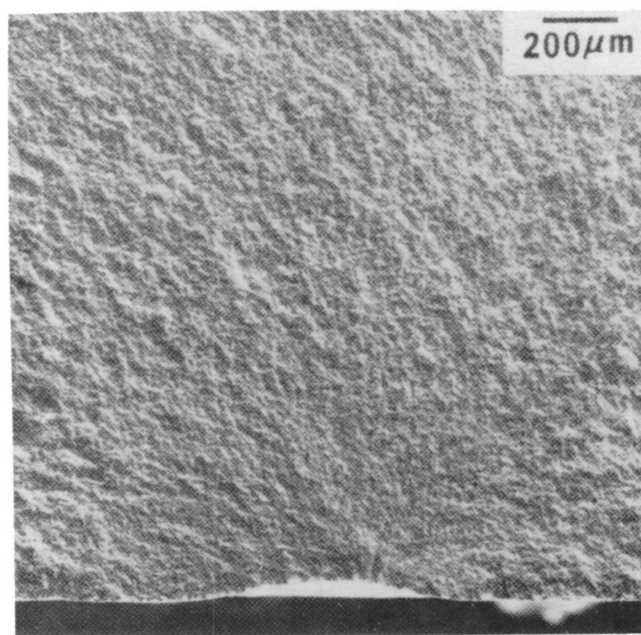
Fracture surface of slip-cast, Pure Carbon Refel RBSiC after oxidation showing glassy puddle at failure origin.
